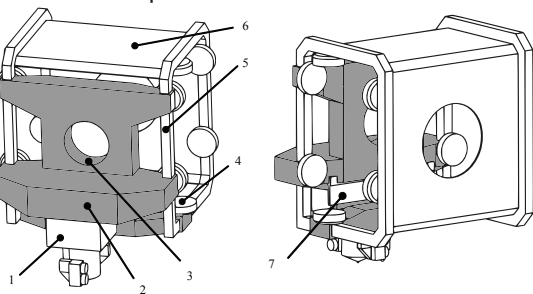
x -stage assembly. 1: optical probe, 2: position frame, 3: weight reduction, 4: air-bearings, 5 & 6: pre-load frame, 7: linear motor.
